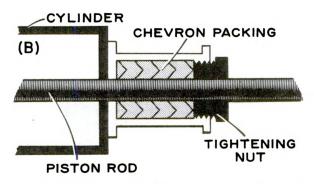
(A) O-ring installed on a piston; (B) V-ring packing.
